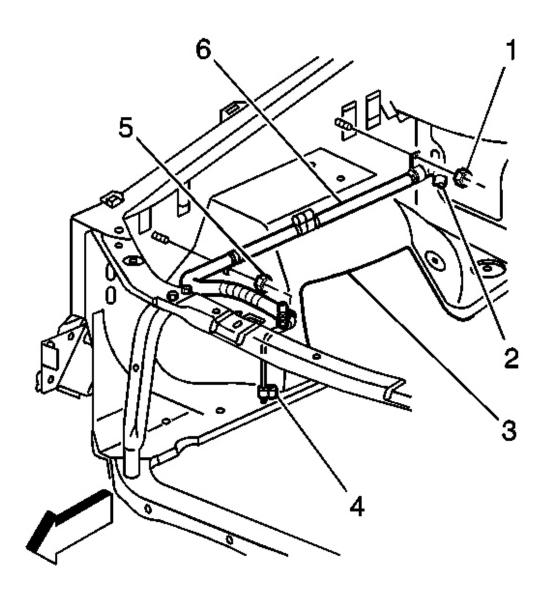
Removing/Installing Evaporator Tube (Short Wheel Base) Courtesy of GENERAL MOTORS CORP.
